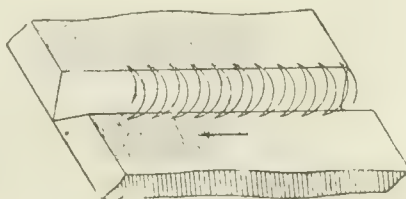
MOTION OF FLAME FOR WELDING
